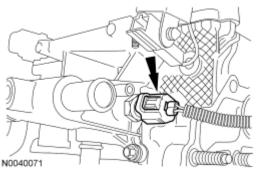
Locating Exhaust Gas Recirculation (EGR) Coolant Hose And Electrical Connector Courtesy of FORD MOTOR CO.
